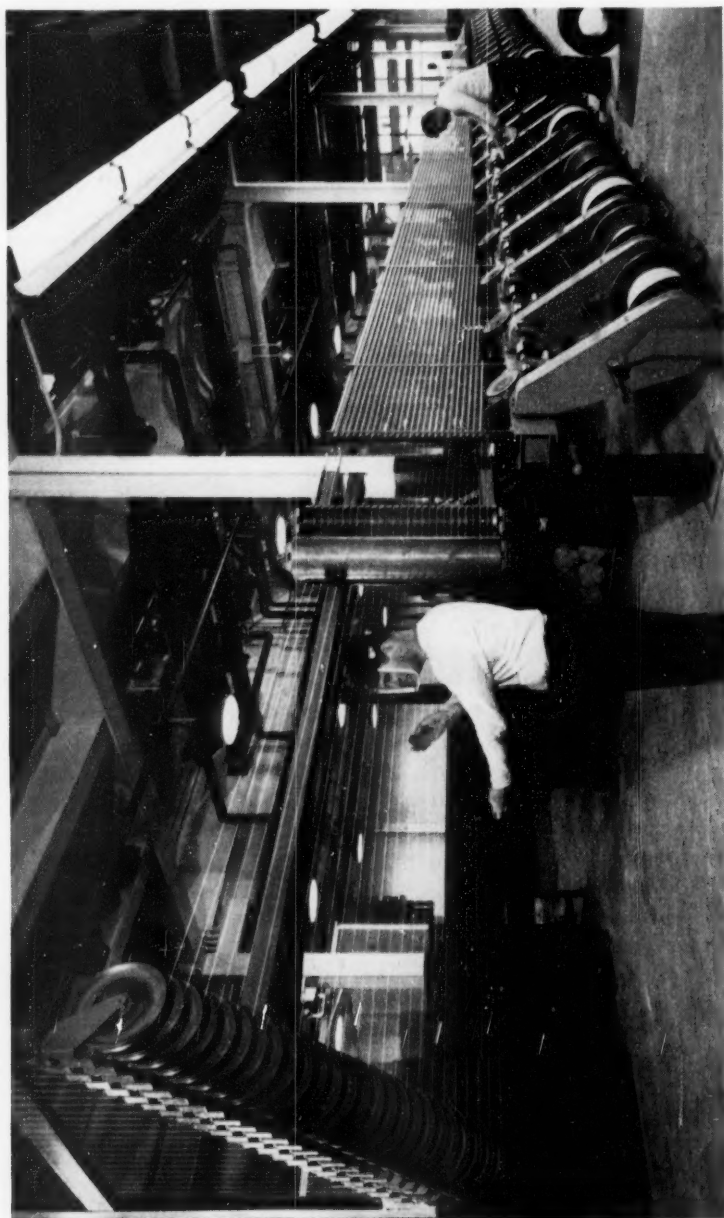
Finished wire, after a series of cleaning and plating operations in the electroforming process, is wound onto take-up reels for final inspection and shipment to the Wire Shop.
